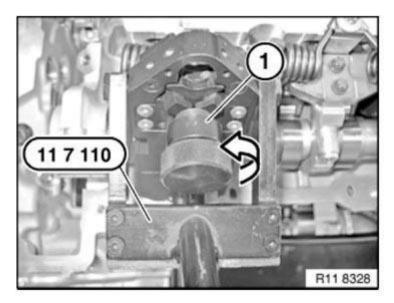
Releasing Knurled Screw On Special Tool 11 7 110 Courtesy of BMW OF NORTH AMERICA, INC.
